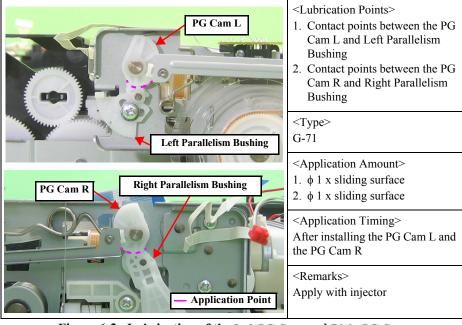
Lubrication of the Left PG Cam and Right PG Cam
